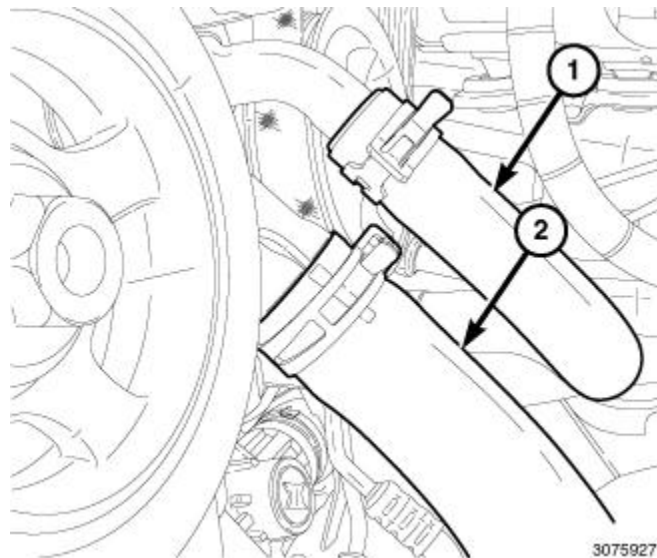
Lower Heater Core Return Hose & Lower Radiator Hose
